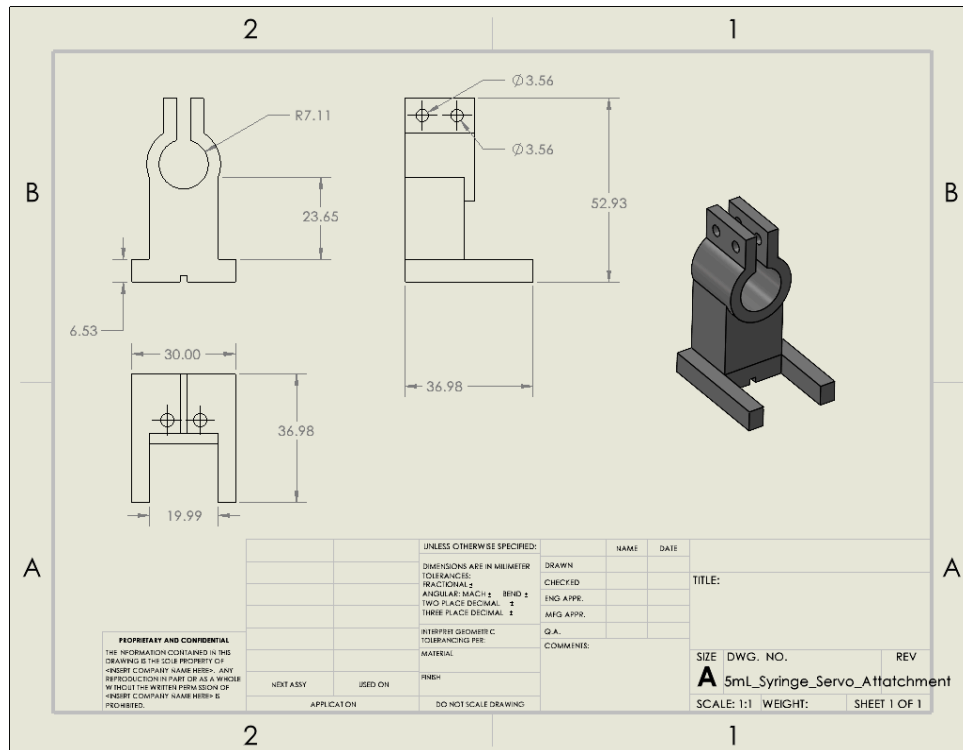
5mL Syringe Servo Attachment CAD Drawing
